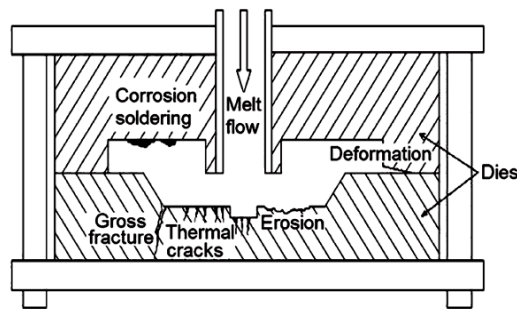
Schematic illustration of defect occurrence on a casting die [32].
